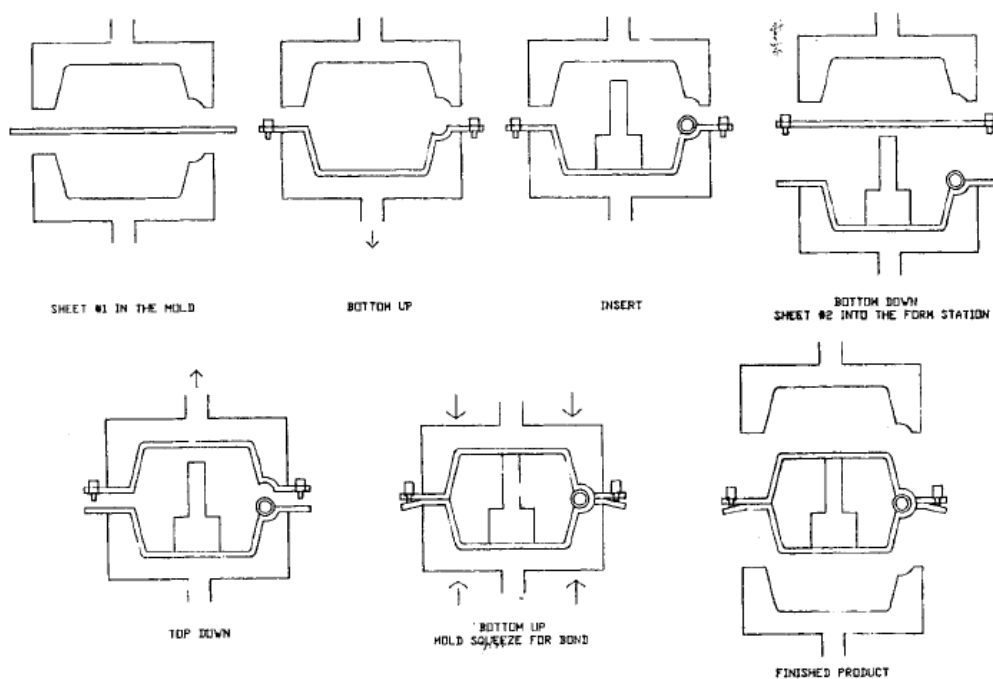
Dual-sheet forming. (Courtesy CAM/Central Automated Machinery, Inc.)
